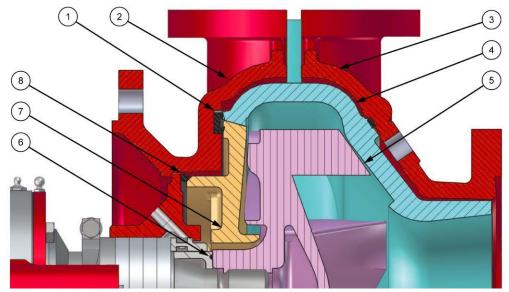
Two Part Metal. Fitting Seal Ring, Frame Plate Liner Insert, Volute Liner Seals, Impeller, Volute Liner and Cover Plate.
